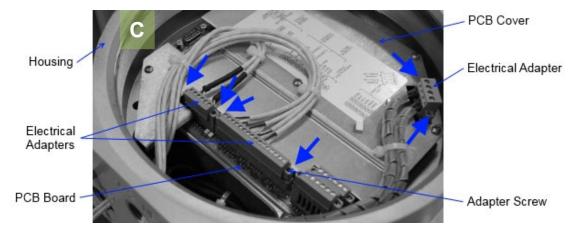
Valve Cover and Housing; Components on Outside of PCB Board
